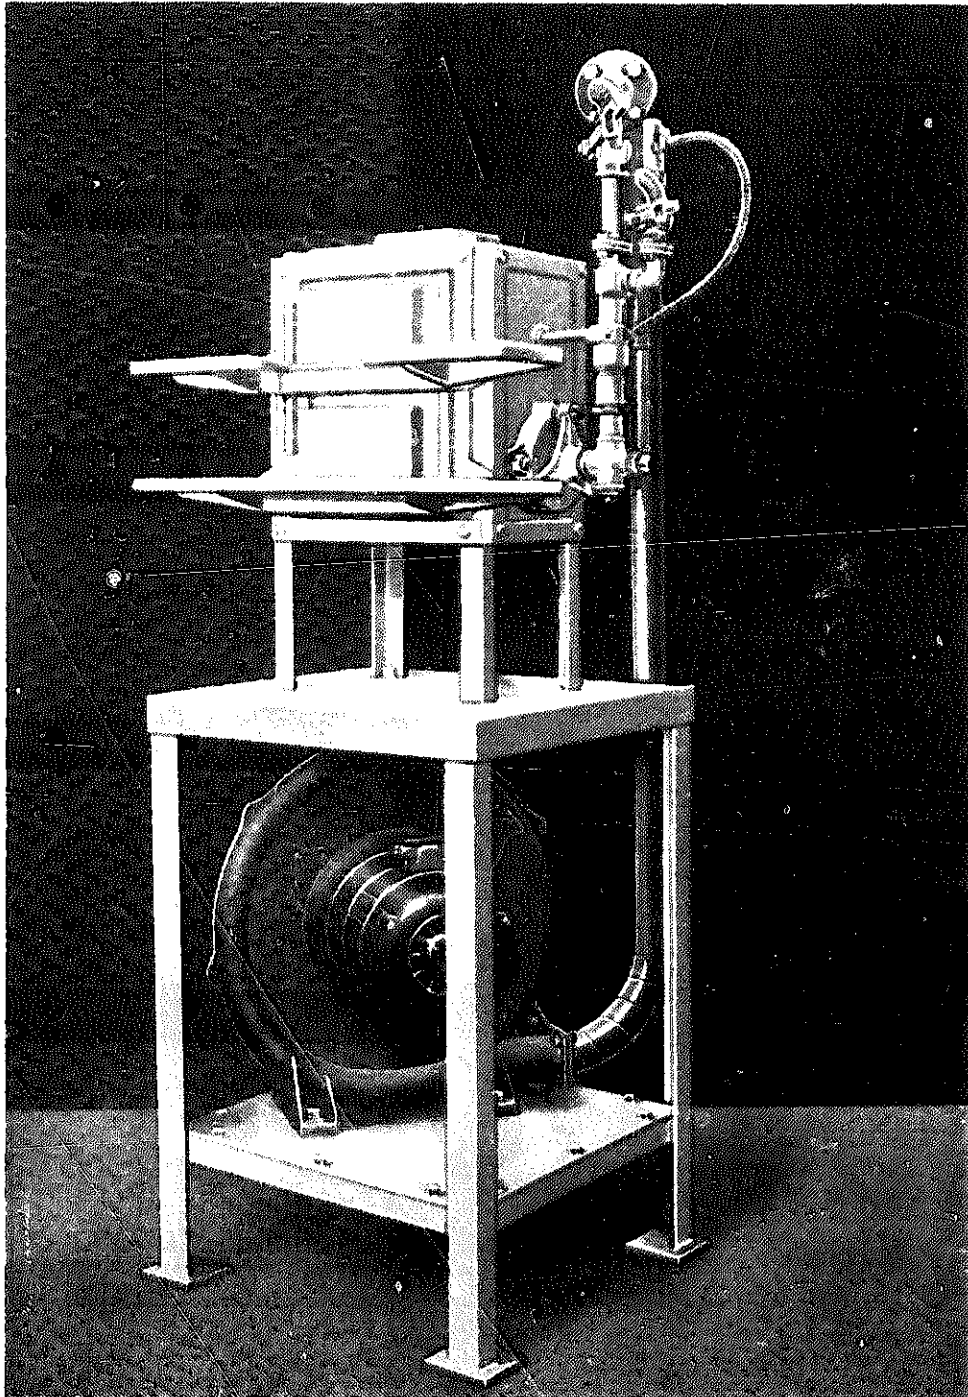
A natural draught gas furnace by Brayshaw Furnaces Ltd.
